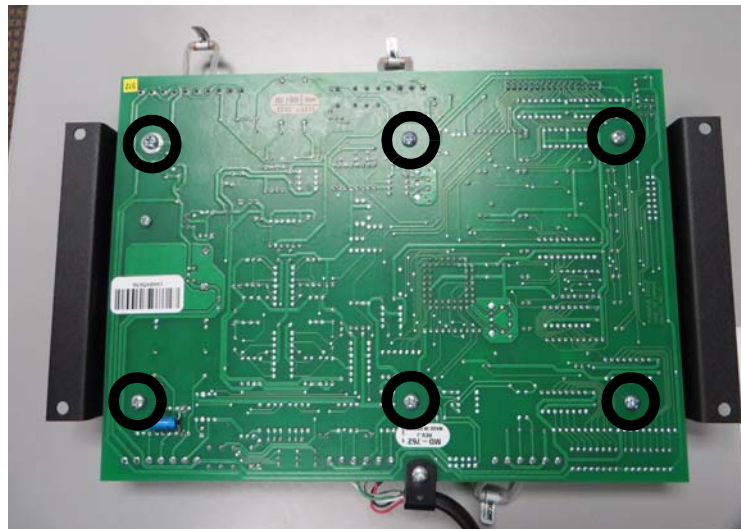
The 6 screws that attach the circuit board to the mounting plate
